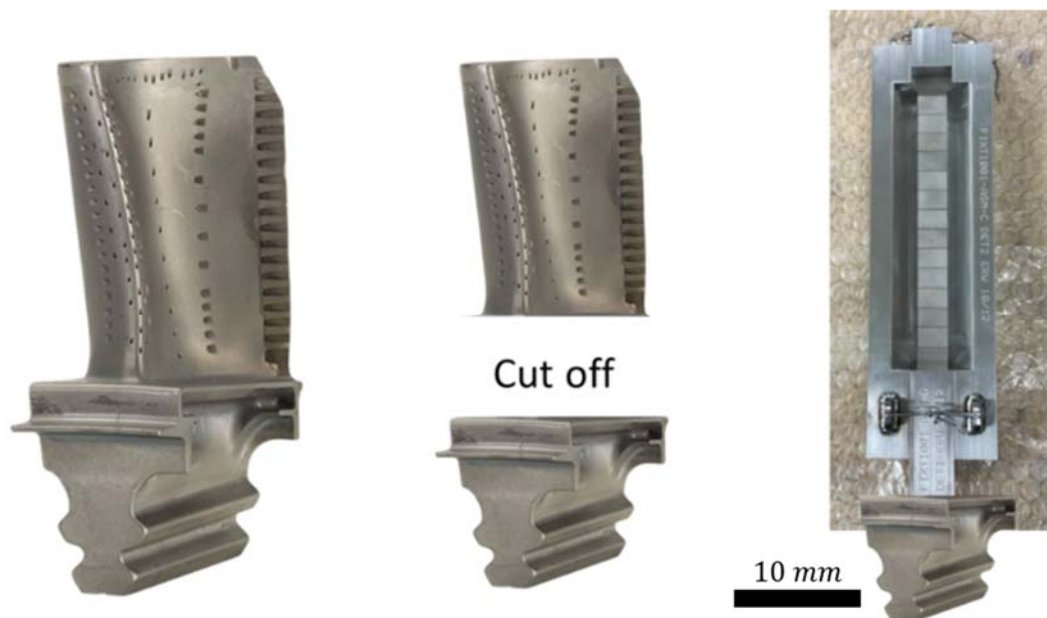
Schematic showing the procedure by which the coating fixture is adapted to fit in the coating chamber
